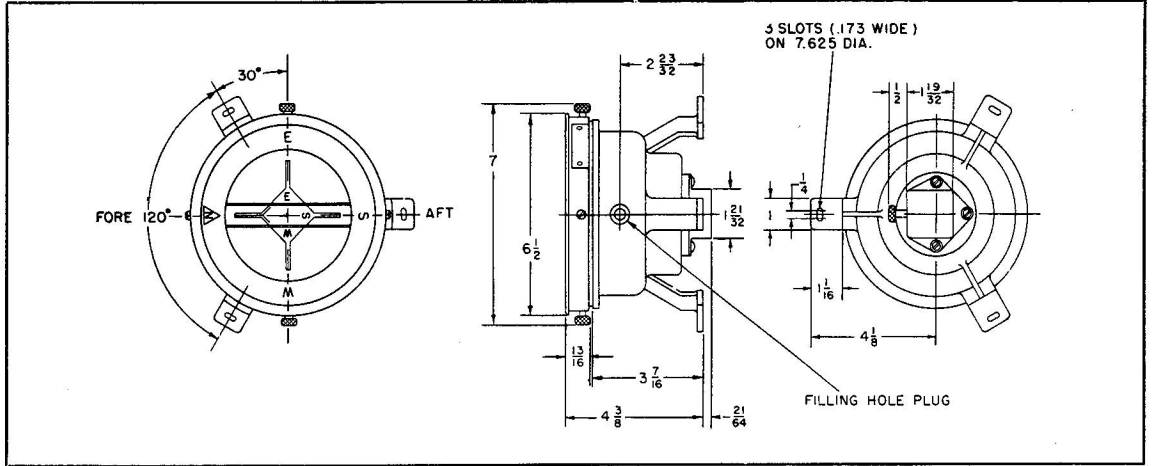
Dimensional Drawing Type D-12 (Pioneer Type 1833-1-A)
